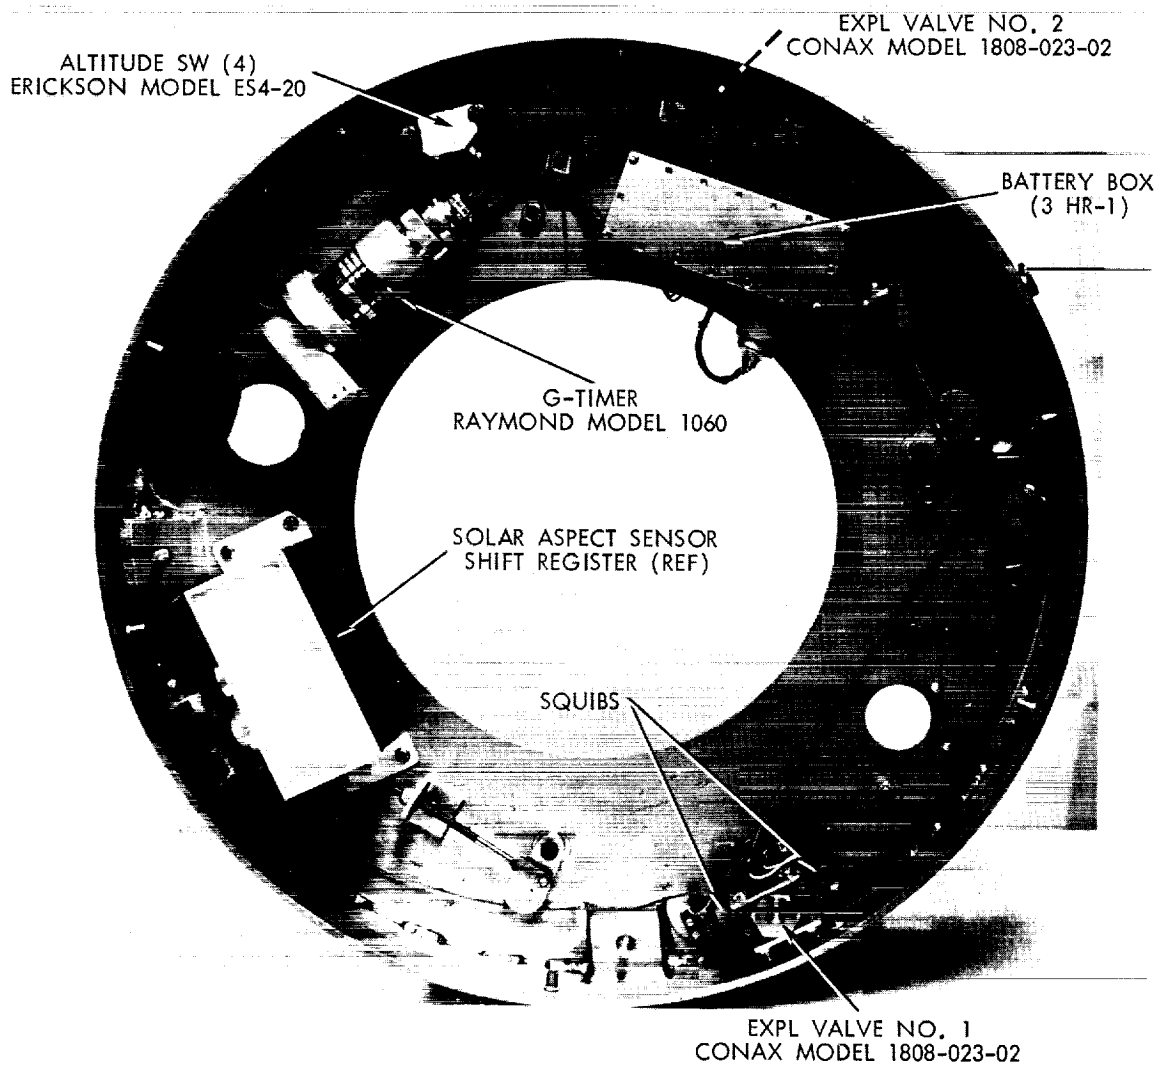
Yo-Yo Despin Assembly, Equipment Location
